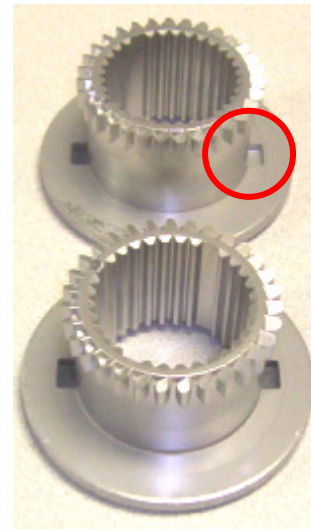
Missed braze pellet defect (indicated by the lack of darker discoloration within red circle) common with sinter brazed powdered metal parts
